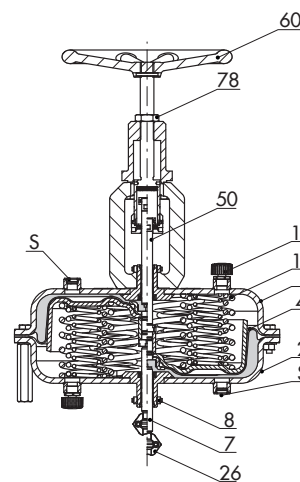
Type 3271 with 750v2 cm² and additional handwheel
